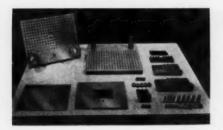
Complete Di-Acro Adjustable Punch and Die Set includes top and bottom plates of die set, punch holders, die holders, punches, dies, socket head cap screws, holddown nuts, locating pilot plugs, material gauges, template and stripper plate.
